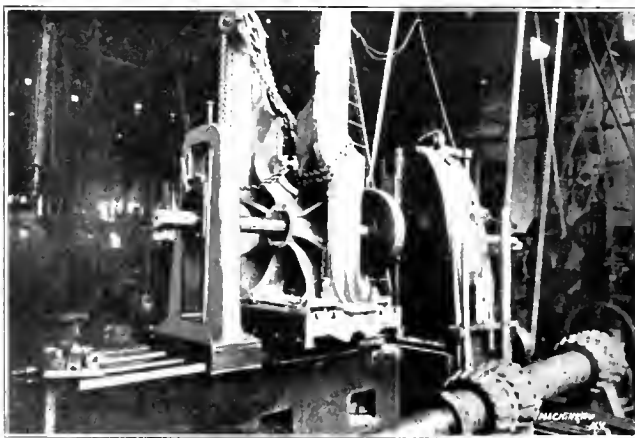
Boring the King-pin Hole in the Front Deck Casting
